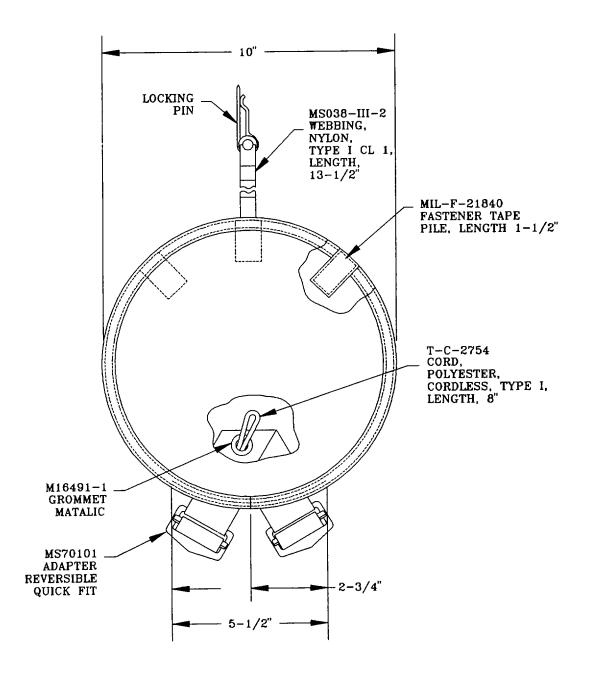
(Container Front Mounted) Vertical Restraint Assembly (Sheet 2 of 3)
